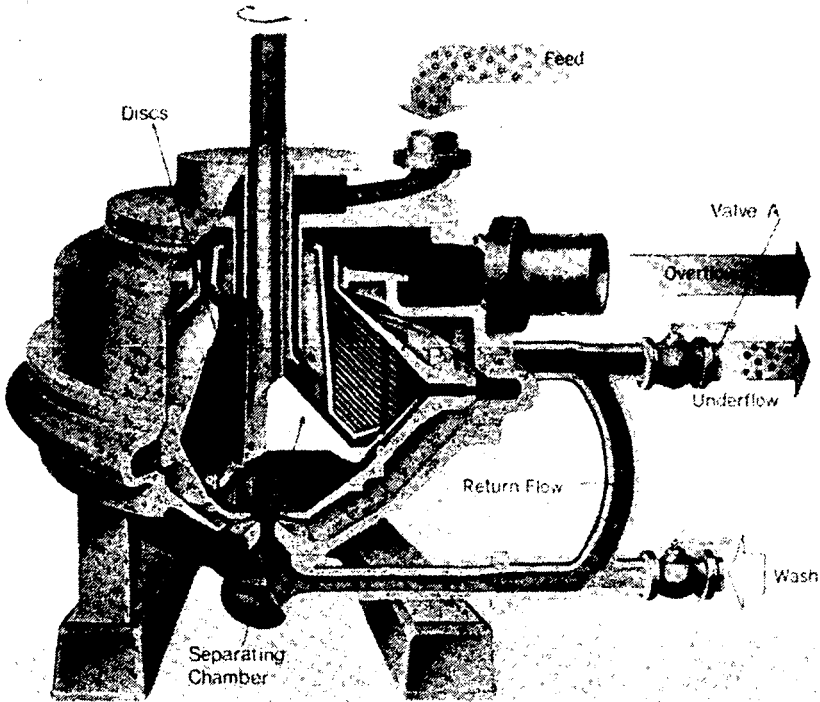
'Exploded' view of nozzle bowl or disc-stack centrifuge.
